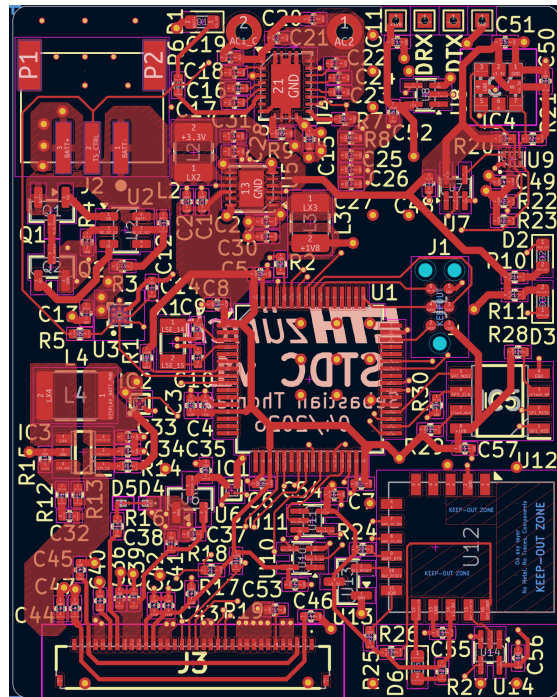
STDC PCB Layer 1 (Primary Routing & Component Placement Layer)
